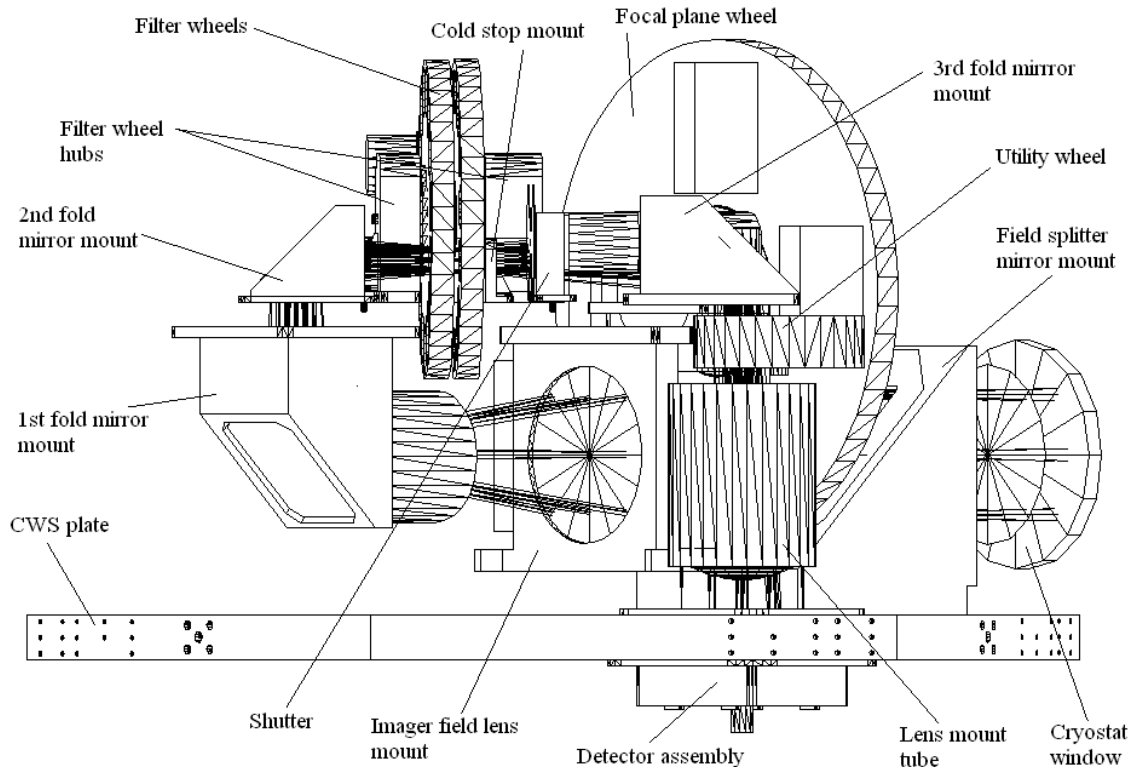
Telecentric imager layout in plane view without the optable being shown.
